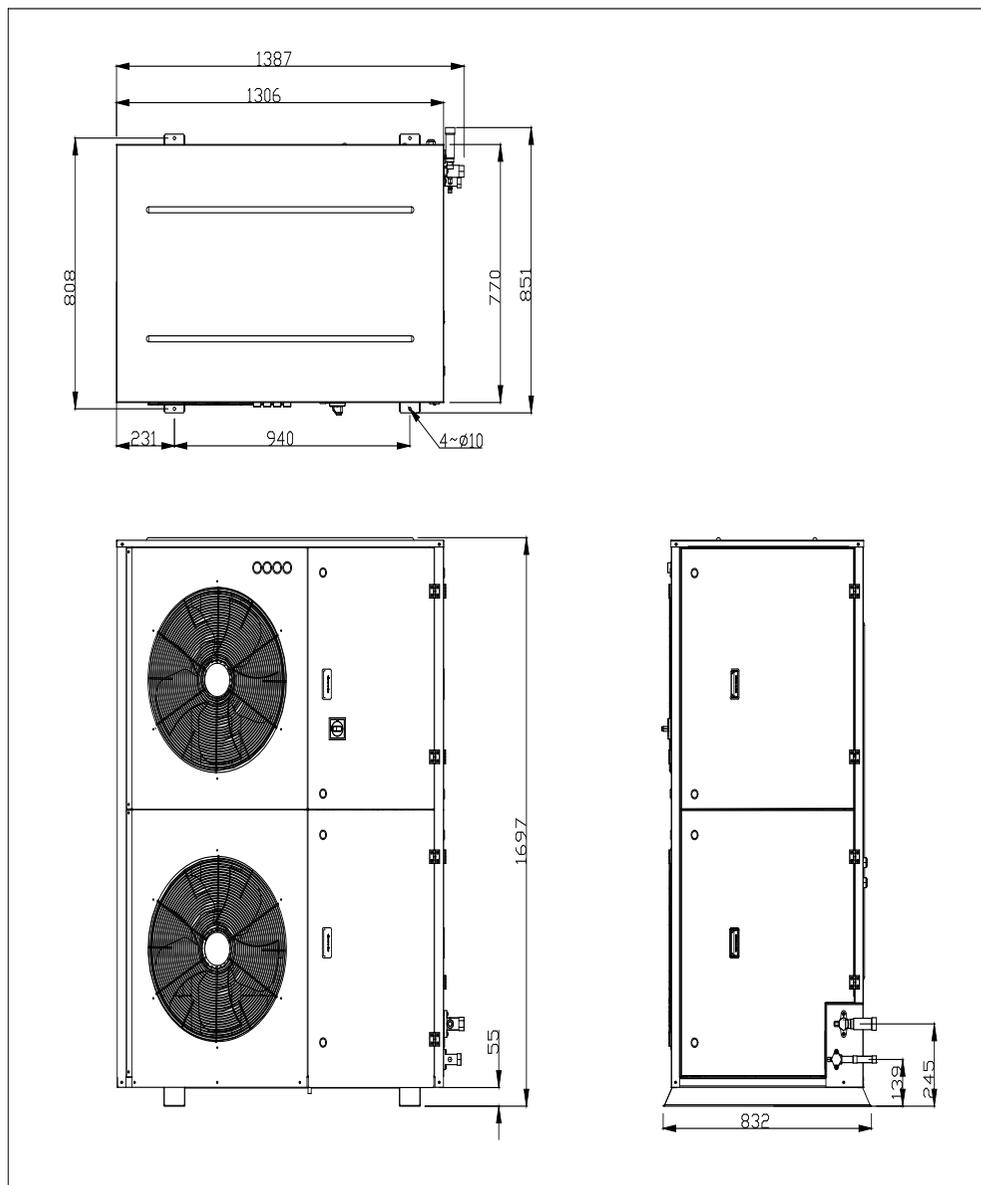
Outline Drawing JEHSDT-1600-B6-M-3
